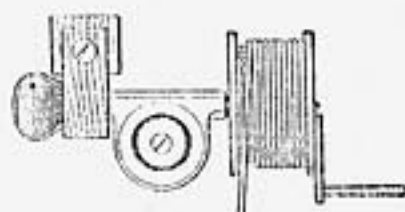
SMALL BOBBIN DRIVEN DIRECTLY ON COUNTER SPINDLE, TURNED BY HAND
